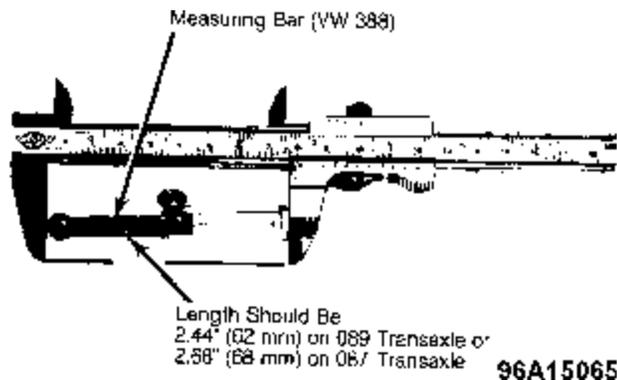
Adjusting Ring Gear Backlash Measuring Bar
